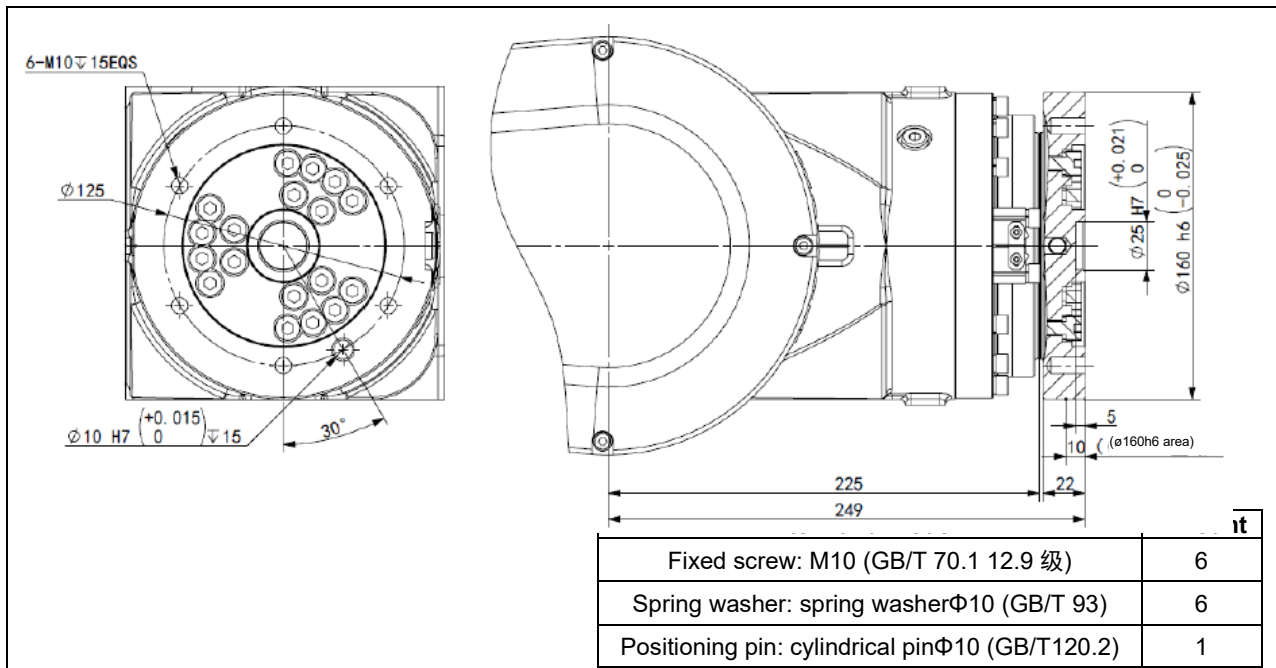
End flange mounting dimension (ER130B-3200)
